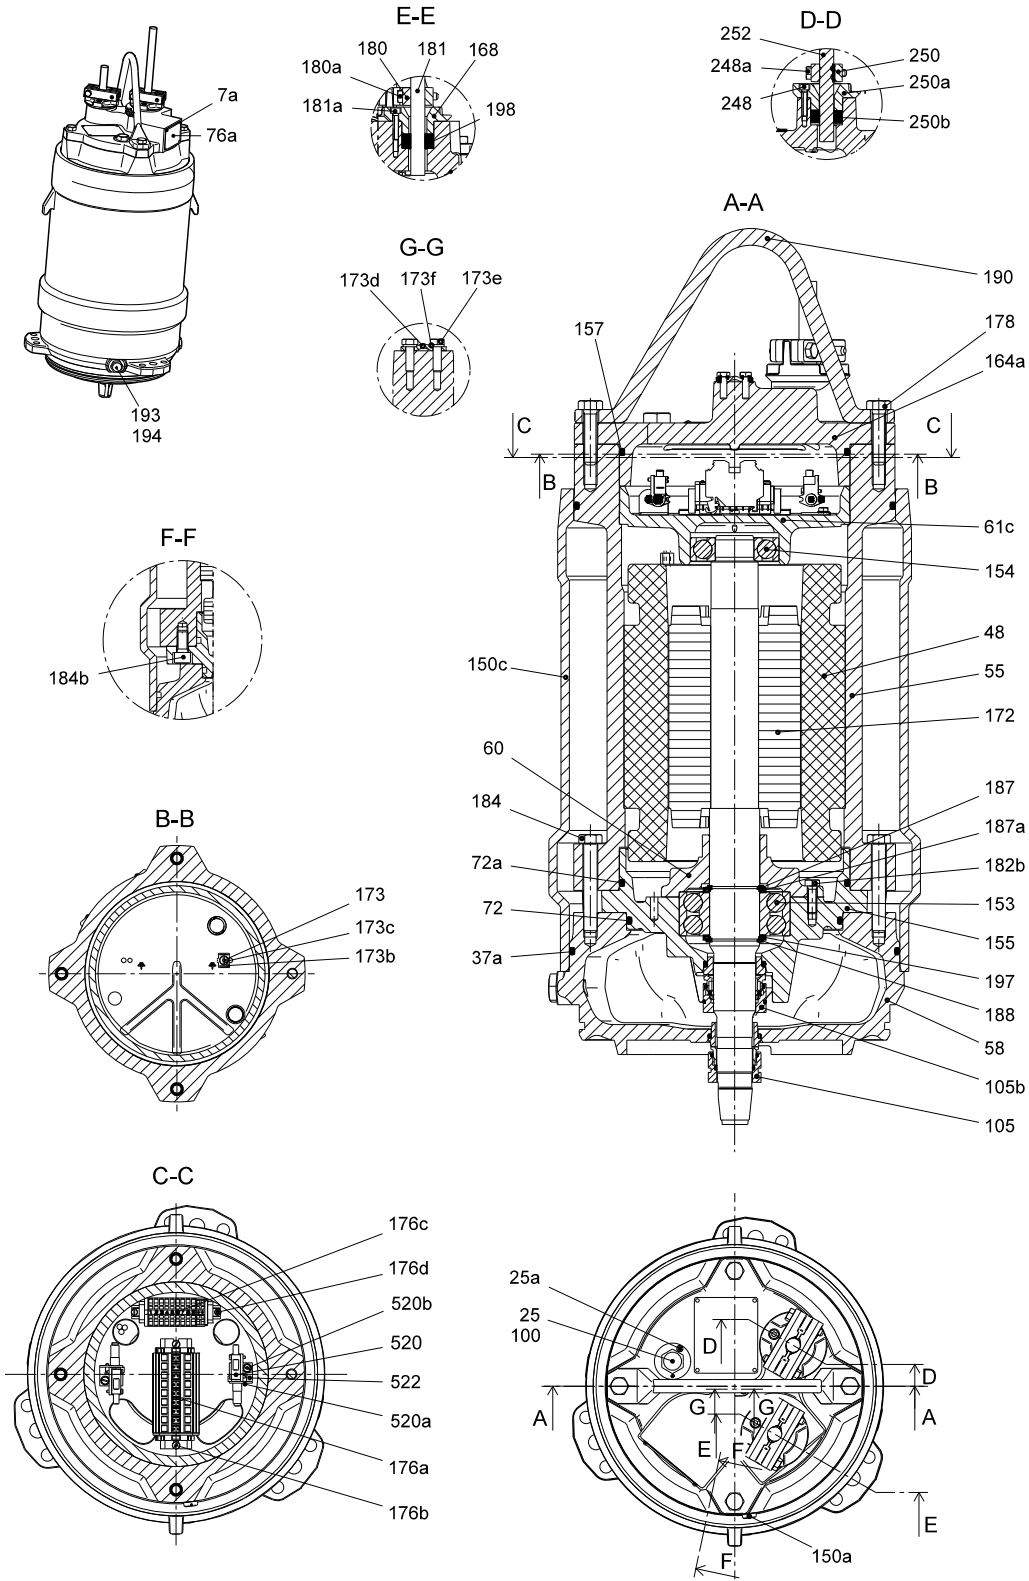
Explosion-proof motor with cooling jacket (installation types C, D and H)
